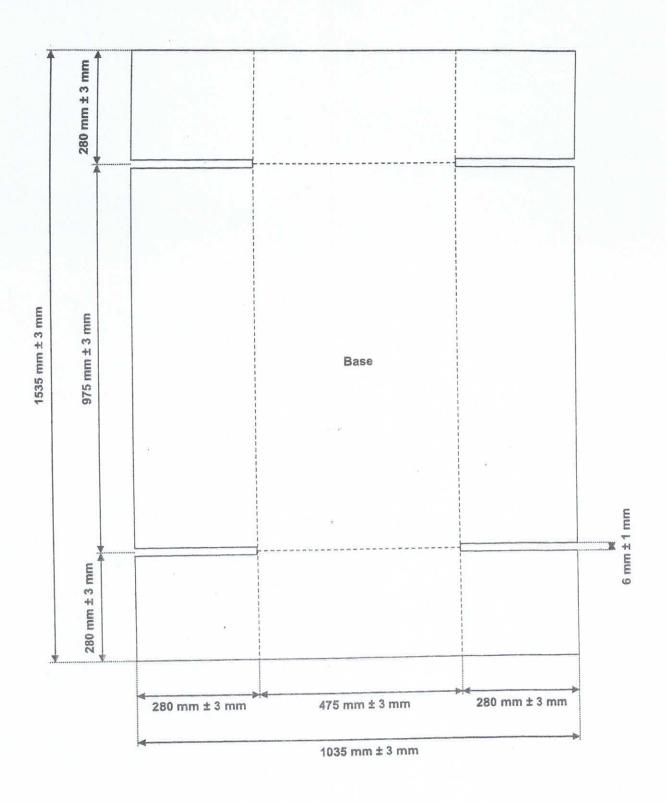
Dimensions of the base component of the telescopic board box (flat measurements)
